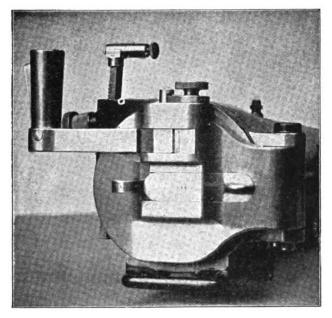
Krupp's 15 cm. screw mechanism, closed.
